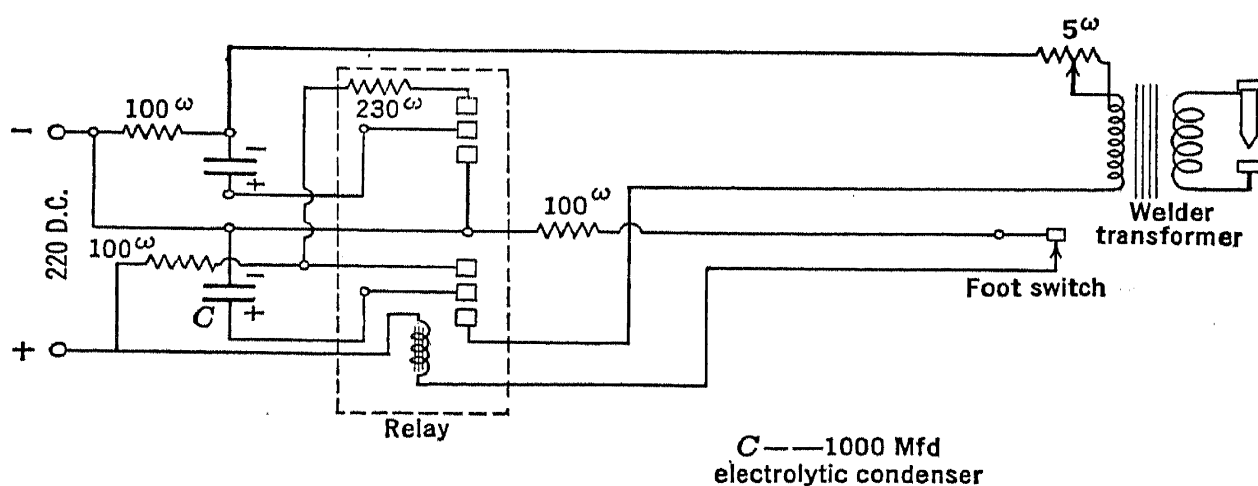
Circuit Diagram of Impulse Welder.
